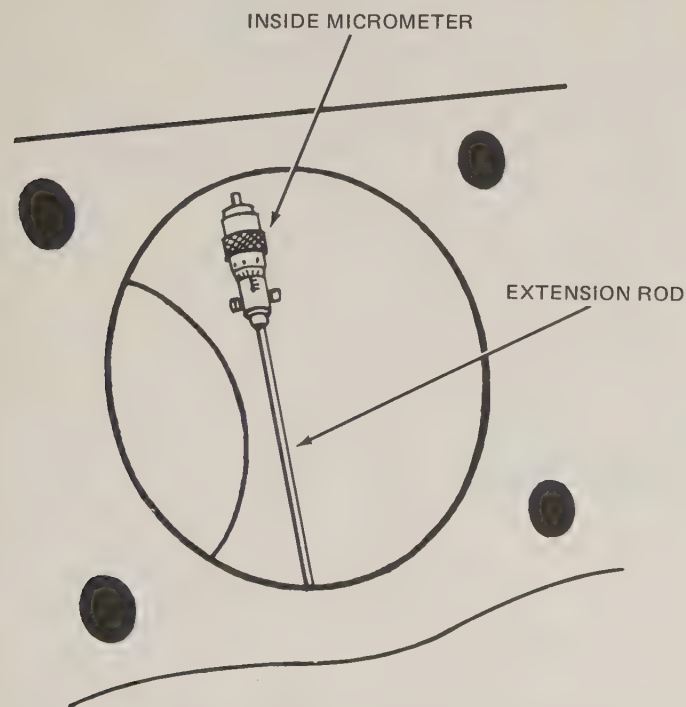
Using an inside micrometer to measure the bore of a cylinder.
